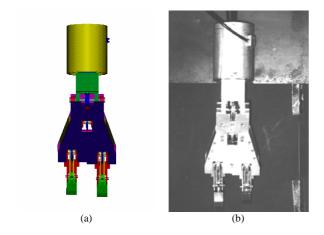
The robot hand and wrist (plan view), (a) CAD drawing, and (b) photograph.
